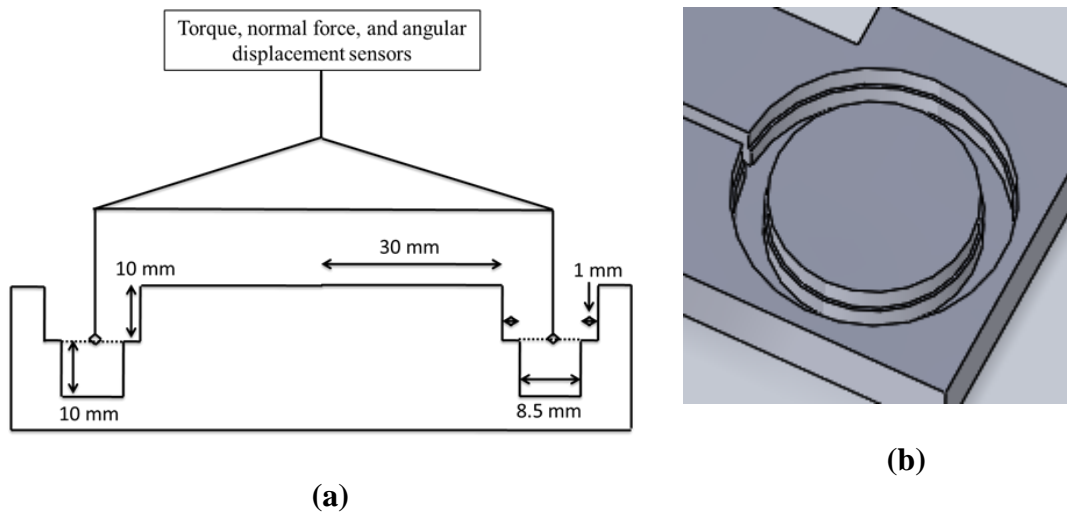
(a) Cross section of the double wall Couette setup. (b) Couette 3-D design drawing via SolidWorks software. [20]
